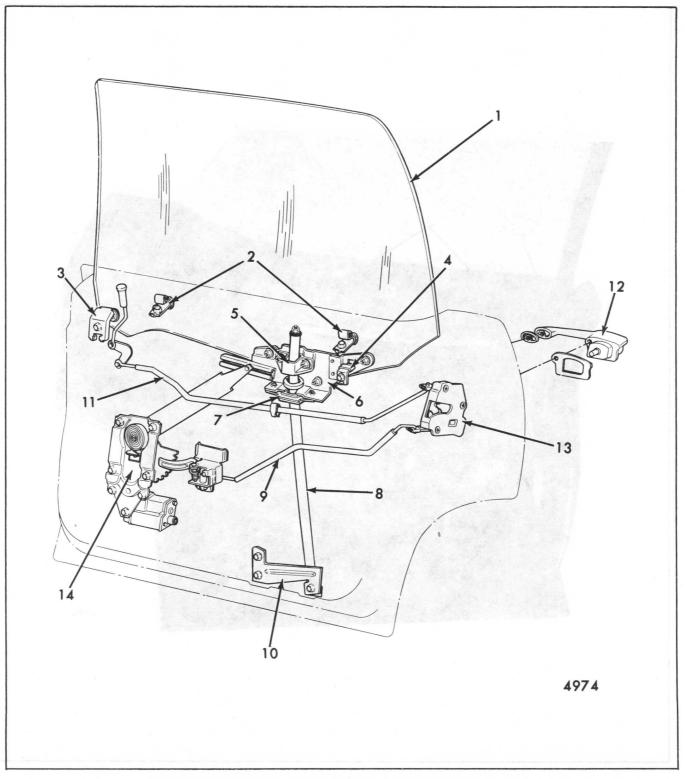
Rear Door Hardware - "6CB69" Style
